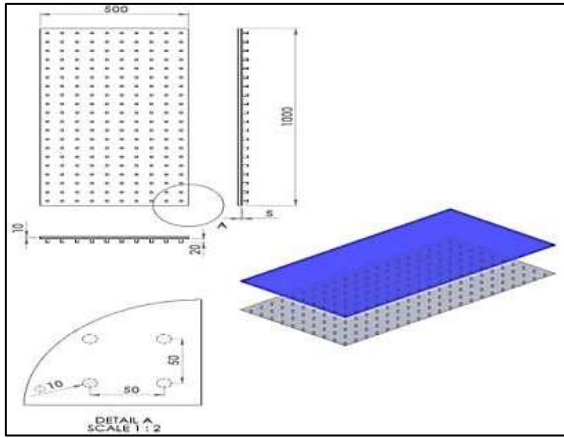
Basic dimensions in (mm) of the panel model with circular pin fin cooling module
